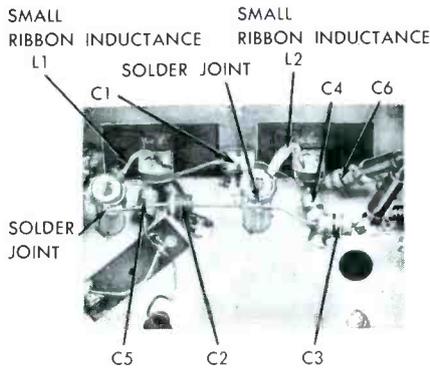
View of UHF Tuner Showing Critical Placement of Components.
